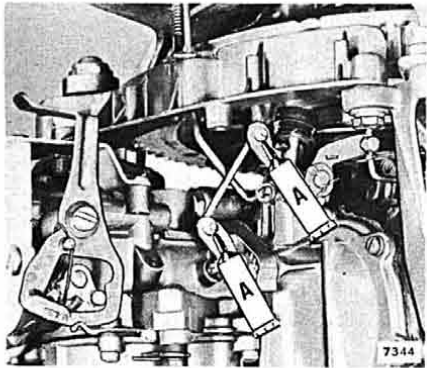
Cam Follower, Carburetor & Magneto Linkage
